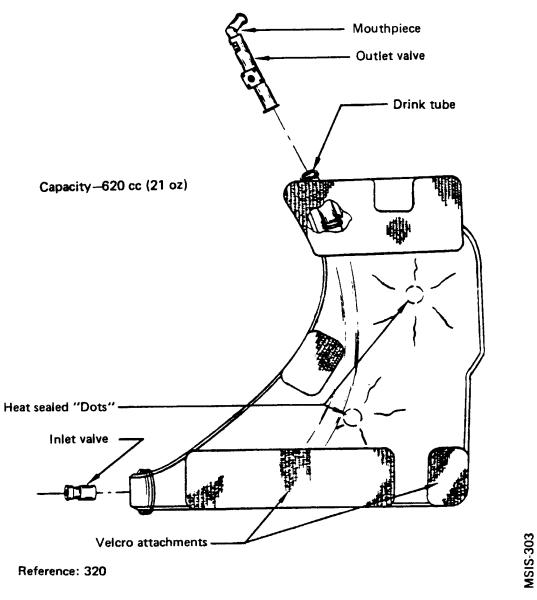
EVA Insuit Drink Bag as an Example of a Way to Provide Water to the EVA Crewmember
